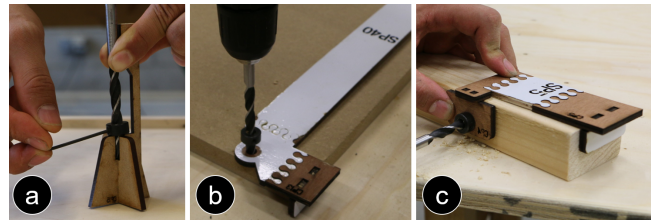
Making a dowel joint requires: (a) transferring the depth of the drill using a template, (b) making a hole in the front and (c) cross face.
